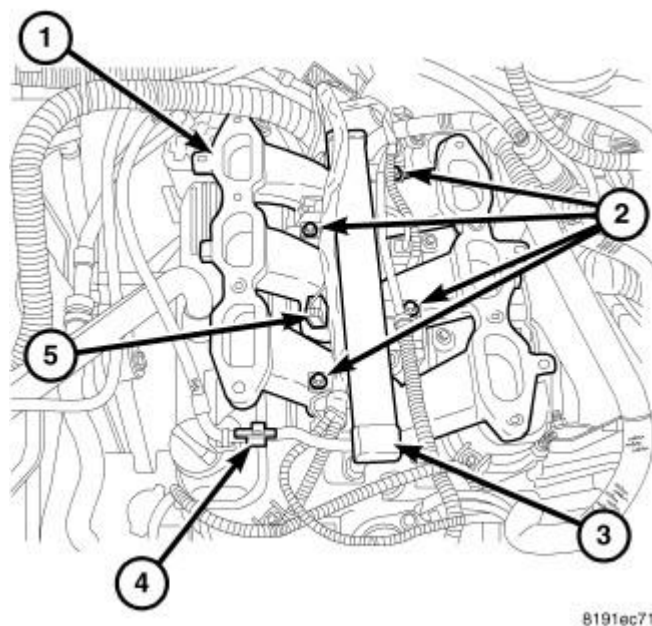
Fuel Injectors, Line, Rail & Fasteners 3.8L
